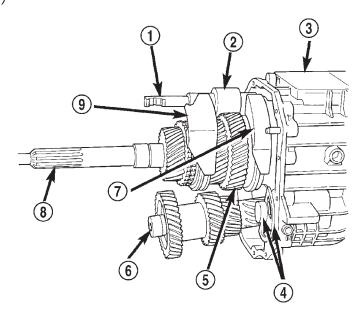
Input Shaft Bearing and Countershaft Front Bearing Race Location
